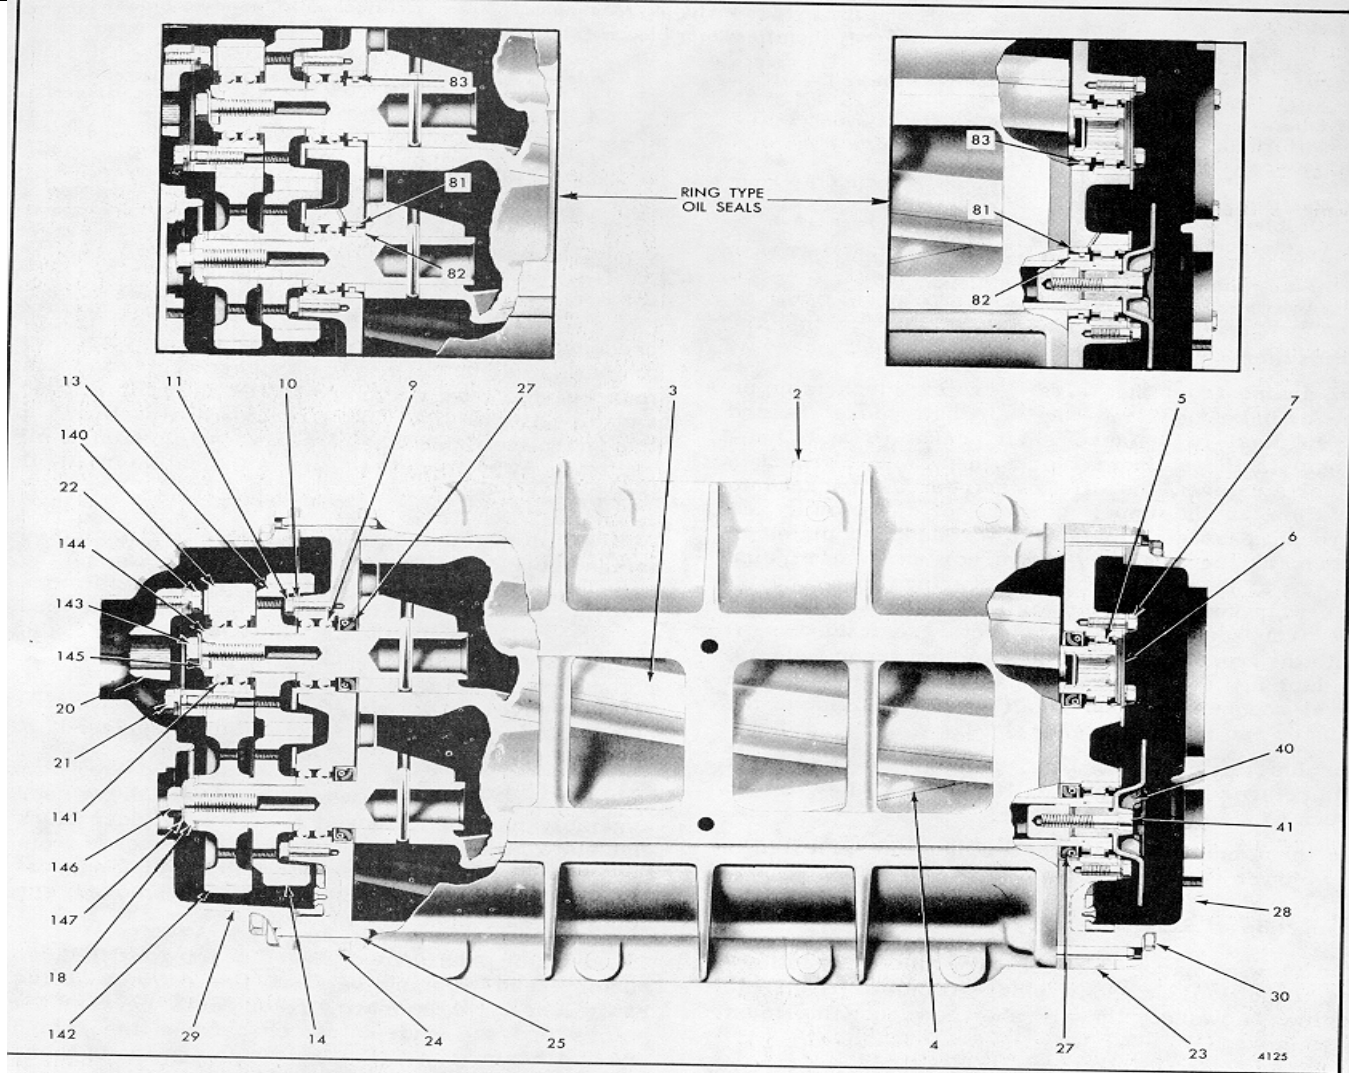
Former Reduction Blower Assembly (71E, 71N and 71T)
